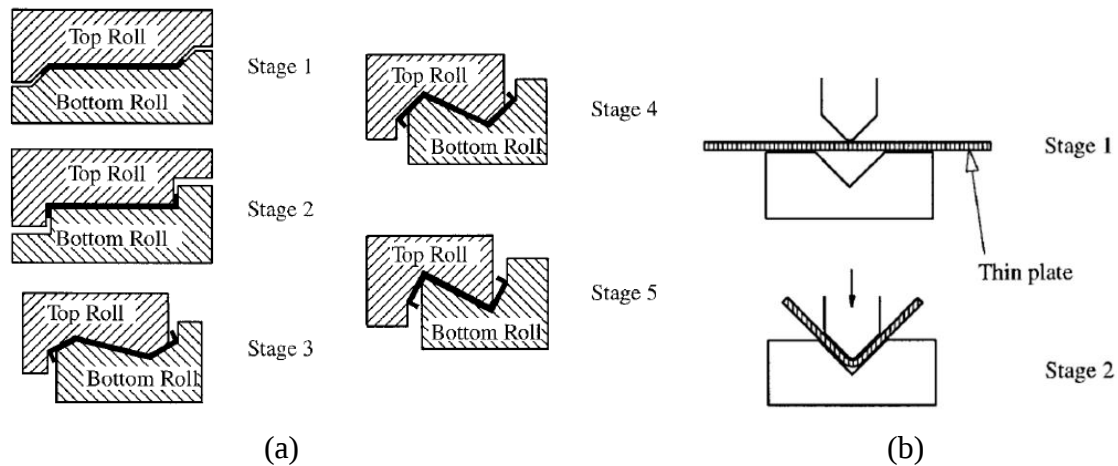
Cold forming processes: (a) roll forming; (b) brake forming (HANCOCK *et al.*, 2001).
